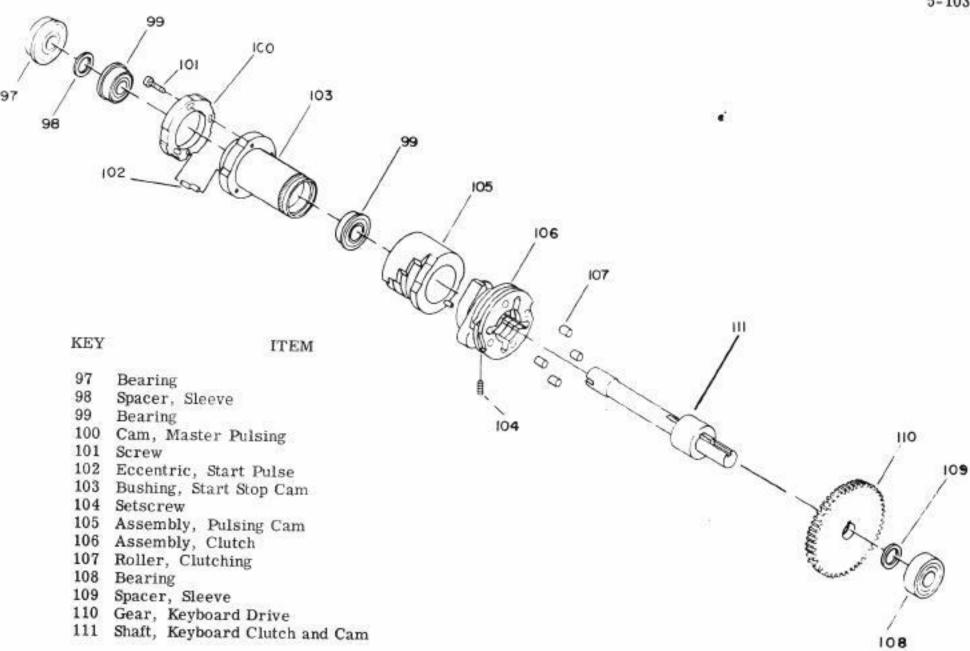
Keyboard Clutch and Cam Assembly (Sheet 3 of 5)
